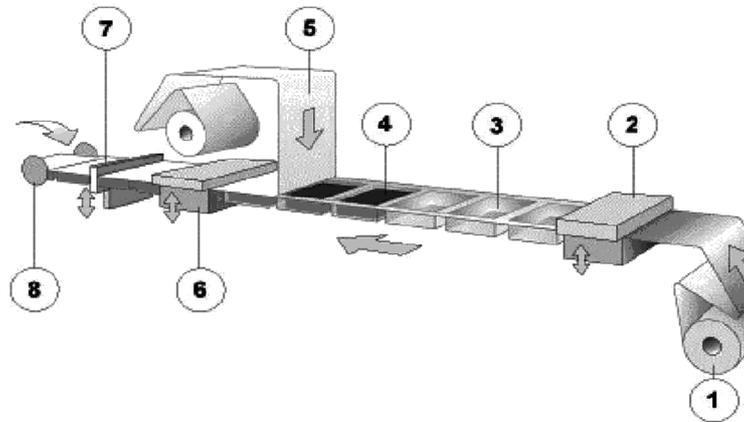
Construction and principle of operation of the thermoforming packaking machine [5]: 1 – bottom web, 2 – station to form the bottom web, 3 – area of loading a product, 4 – drawpieces with a product, 5 – station to unwind the top web, 6 – sealing head, 7 and 8 – sub-assembly to cut-out the package
